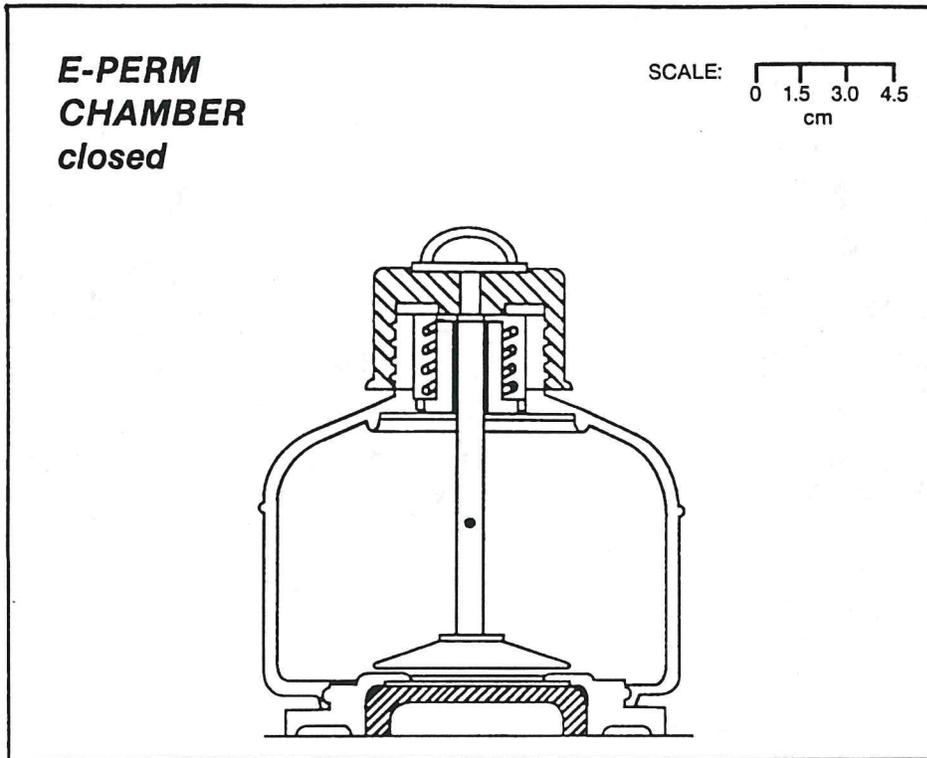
SECTIONAL DRAWING OF E-PERM
